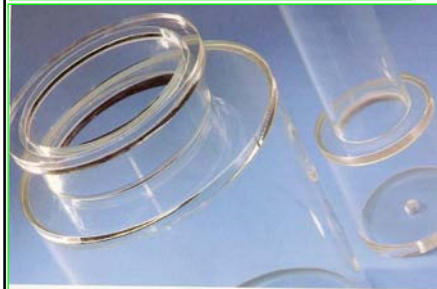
| Example of high-quality laser welding of transparent plastic parts using the Clearweld technology. A light-absorbing dye is sandwiched between the components to be joined. On illumination with a laser it heats up, melting the interface between the parts. Advantageously, the dye becomes colourless in the process leaving a weld seam that is invisible to the naked eye.
